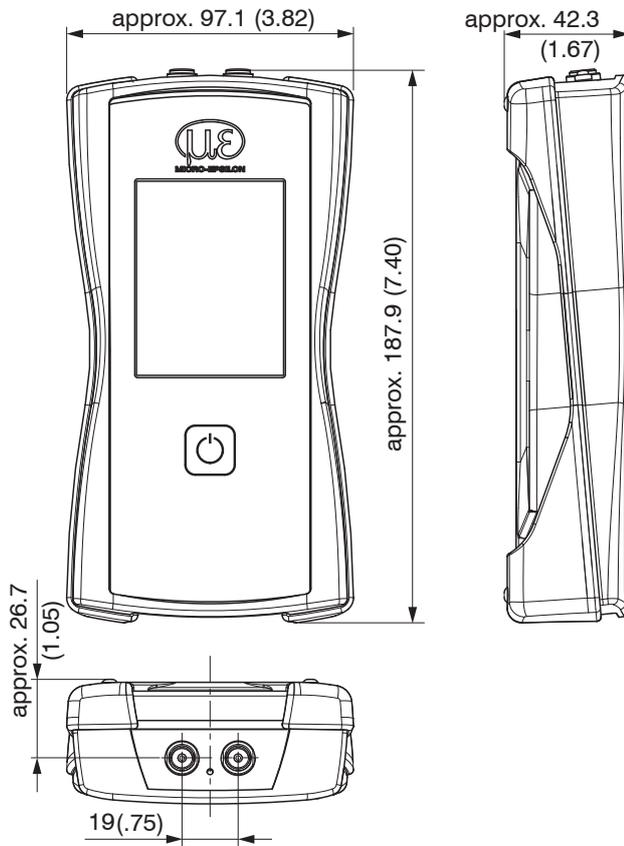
Dimensional drawing Controller, dimensions in mm (inches), not to scale
